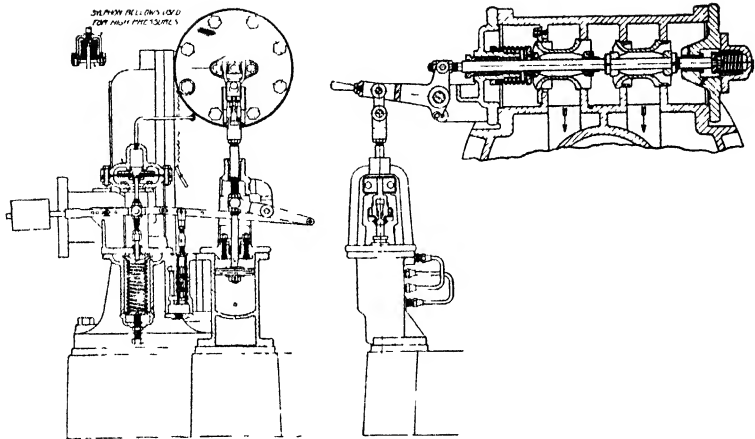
Cross section of bleeder turbine showing valve and pressure control mechanism
